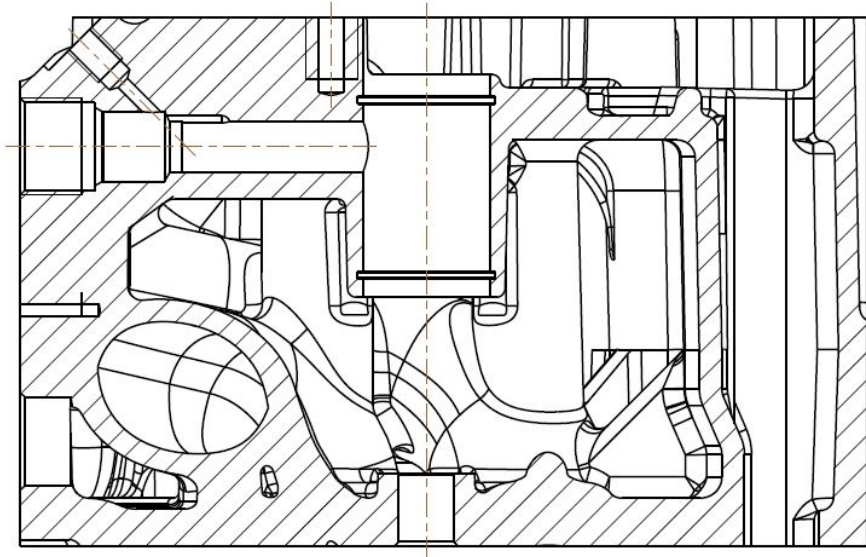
Cross-section of an improved cylinder head with o-rings
